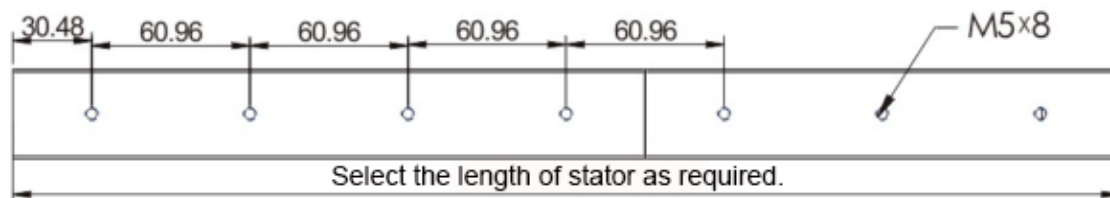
Dimensional drawing of WZCR-U50 series stator
